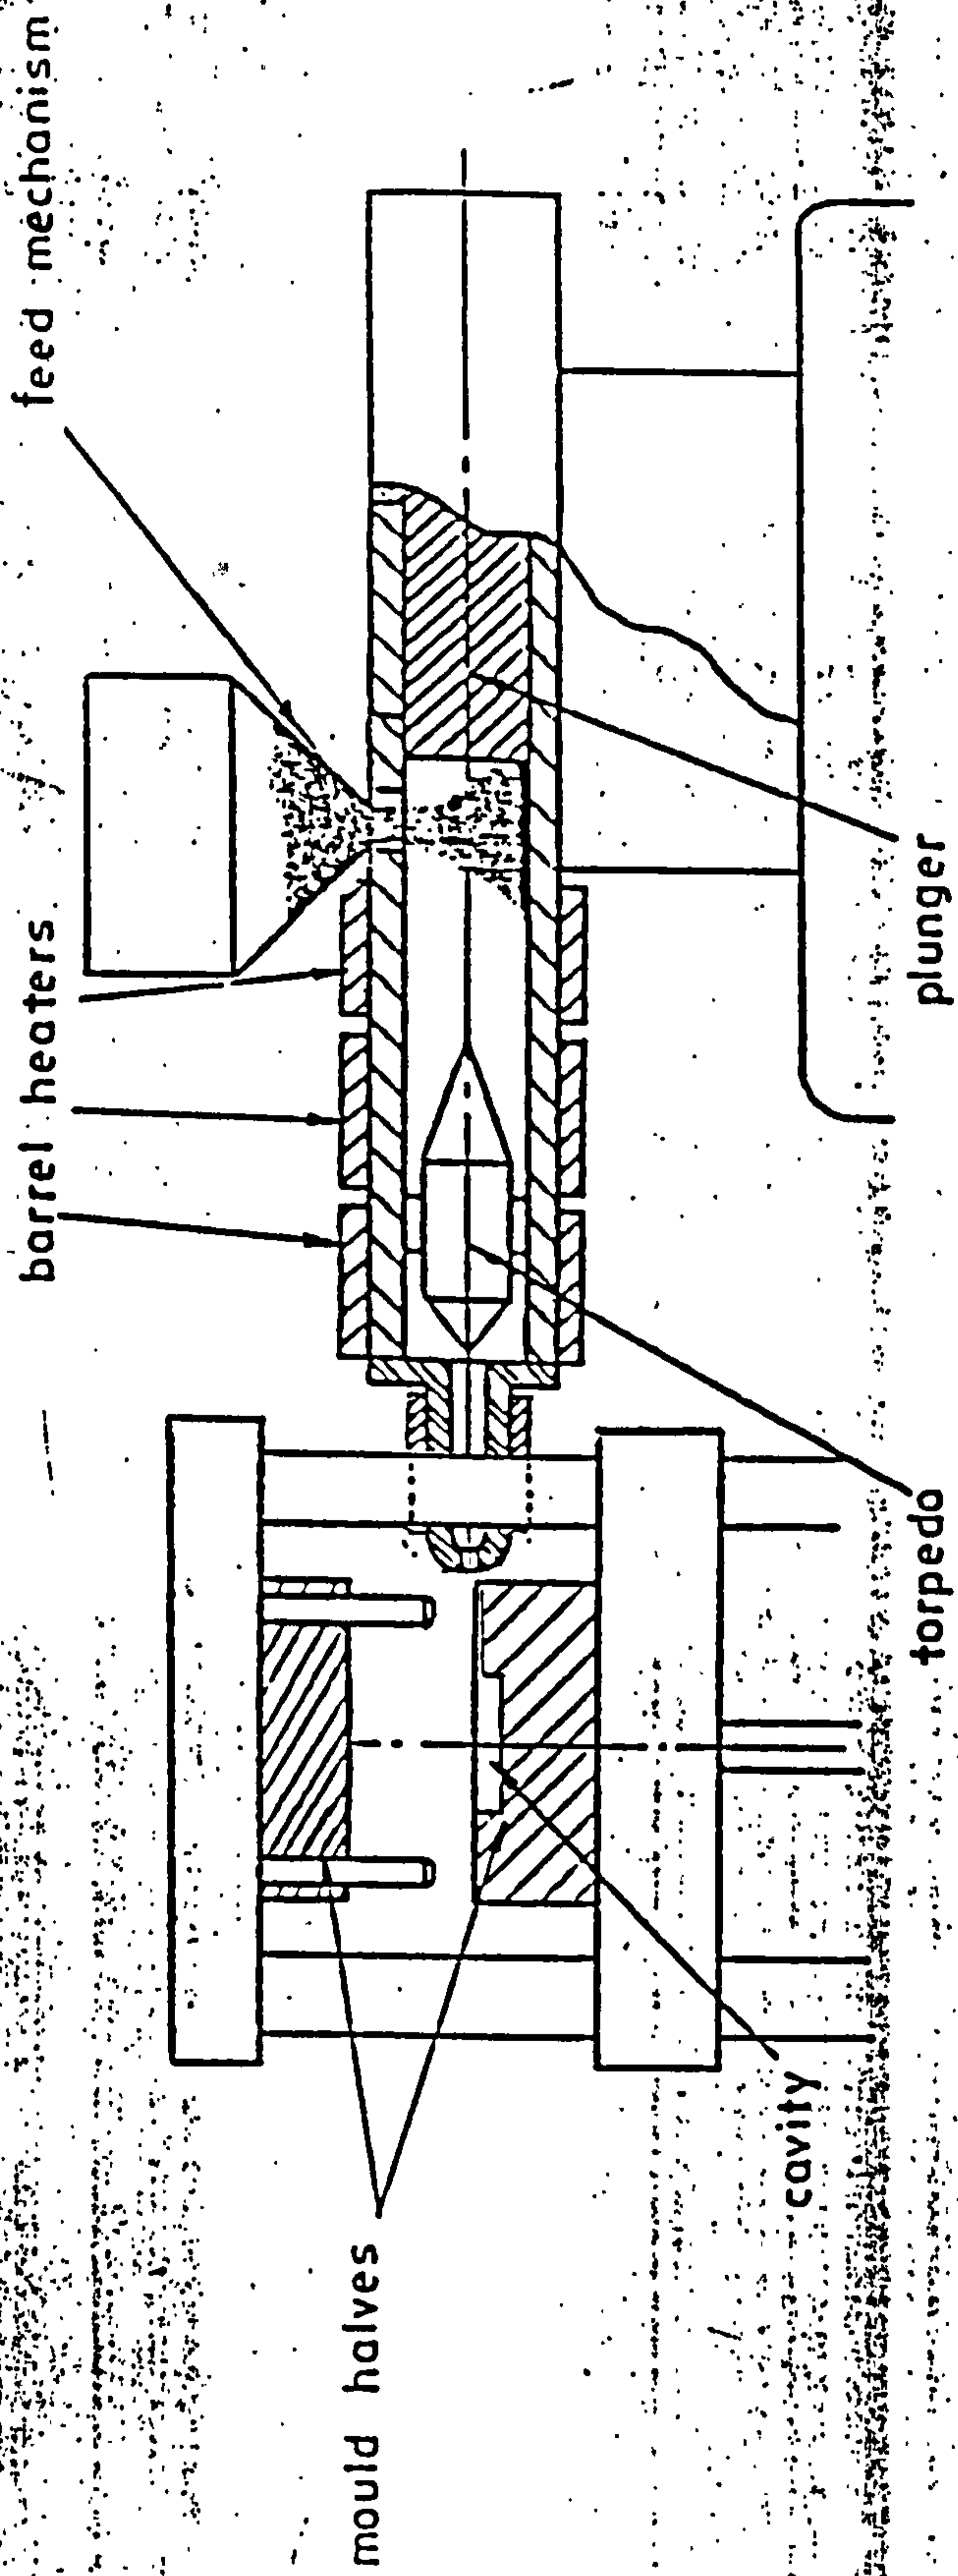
Schematic diagram of the Fox and Offord plunger type injection moulding machine used for mouldings of simple geometries.
